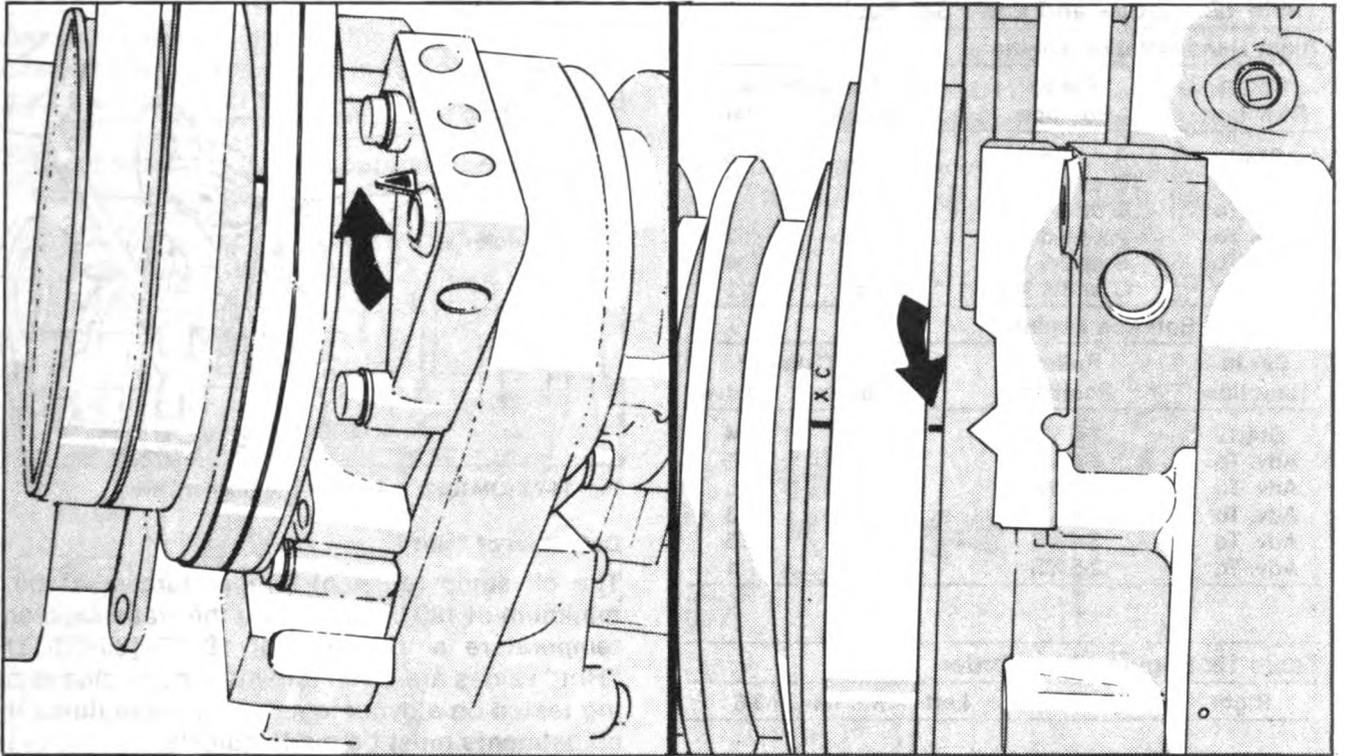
(OM1050L). Align The Timing Marks With Pointer On The Gear Cover.
